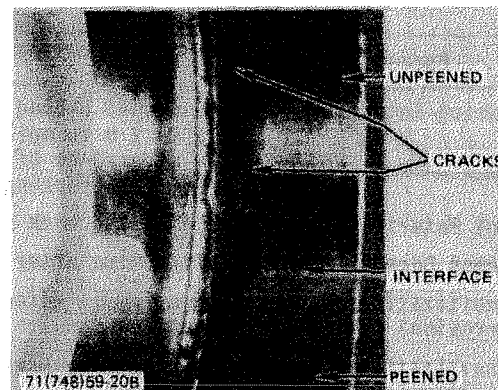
Stress corrosion cracks in unpeened Type 347 stainless steel pipe weld surface. There are no cracks in the peened surface.
